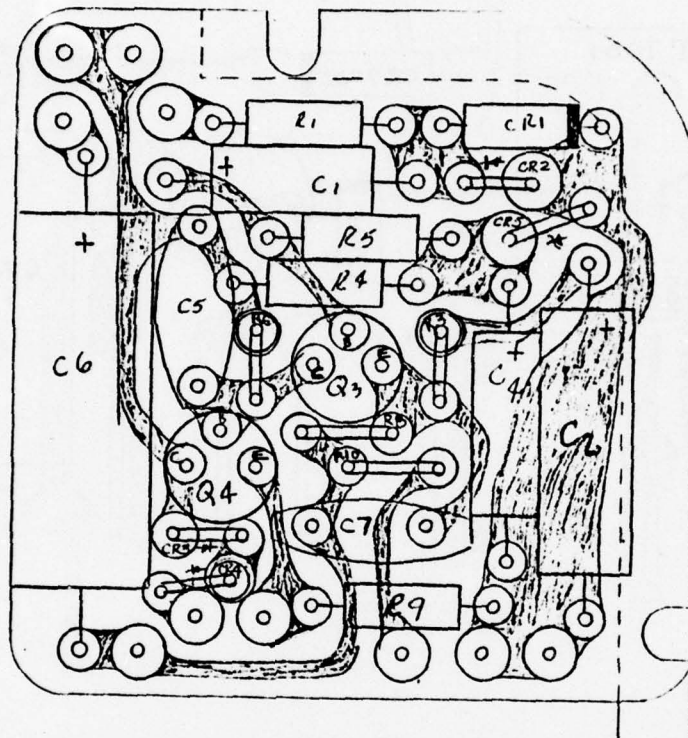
P.C. BOARD LAYOUT FOR THE A7200A
